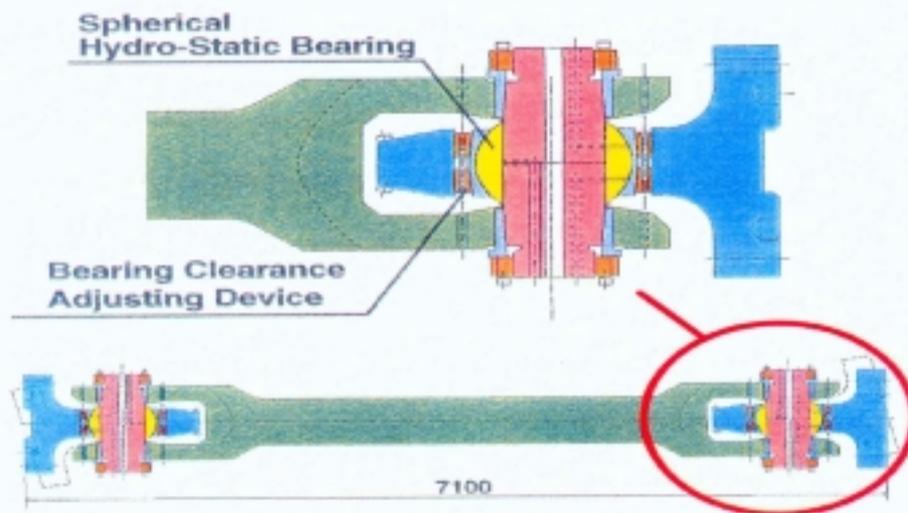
Large 3-D mechanical joint with high pressure spherical bearing
